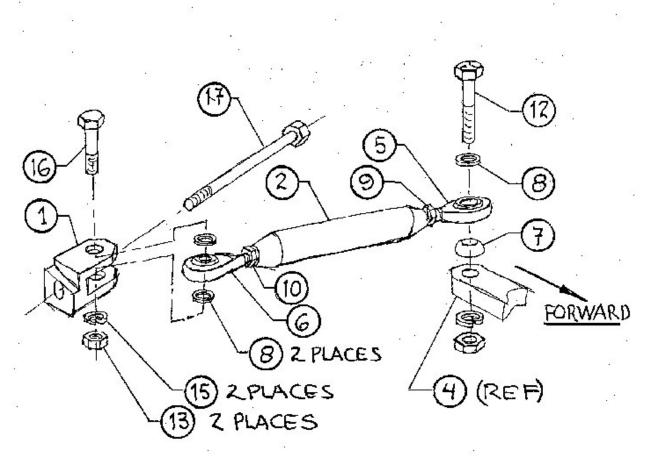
AXLE PICKUP & TUBE INSTALLATION (QUARTER ELIPTIC) Remove the right rear road wheel and support the spring at the axle.
